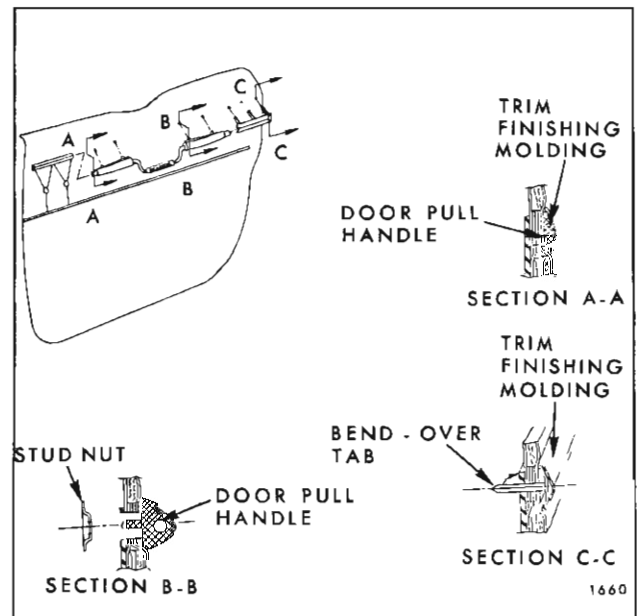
D9—Door Pull Handle Installation - 38000 Series
